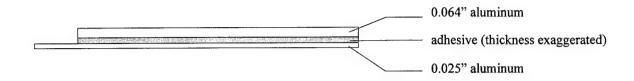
Cross Section of a Floating Roller Peel Test Specimen
